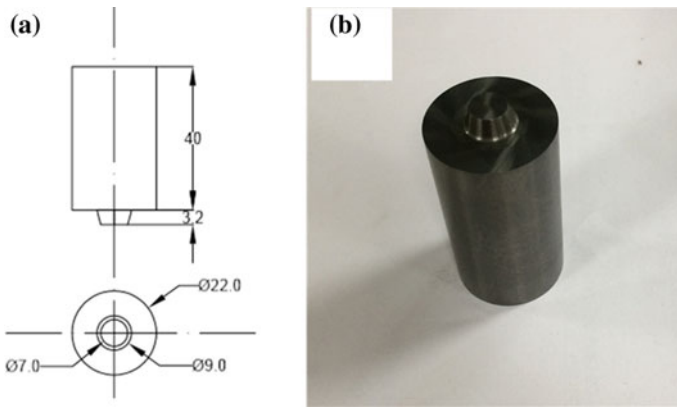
a Illustration of the FSW tool, b FSW tool
